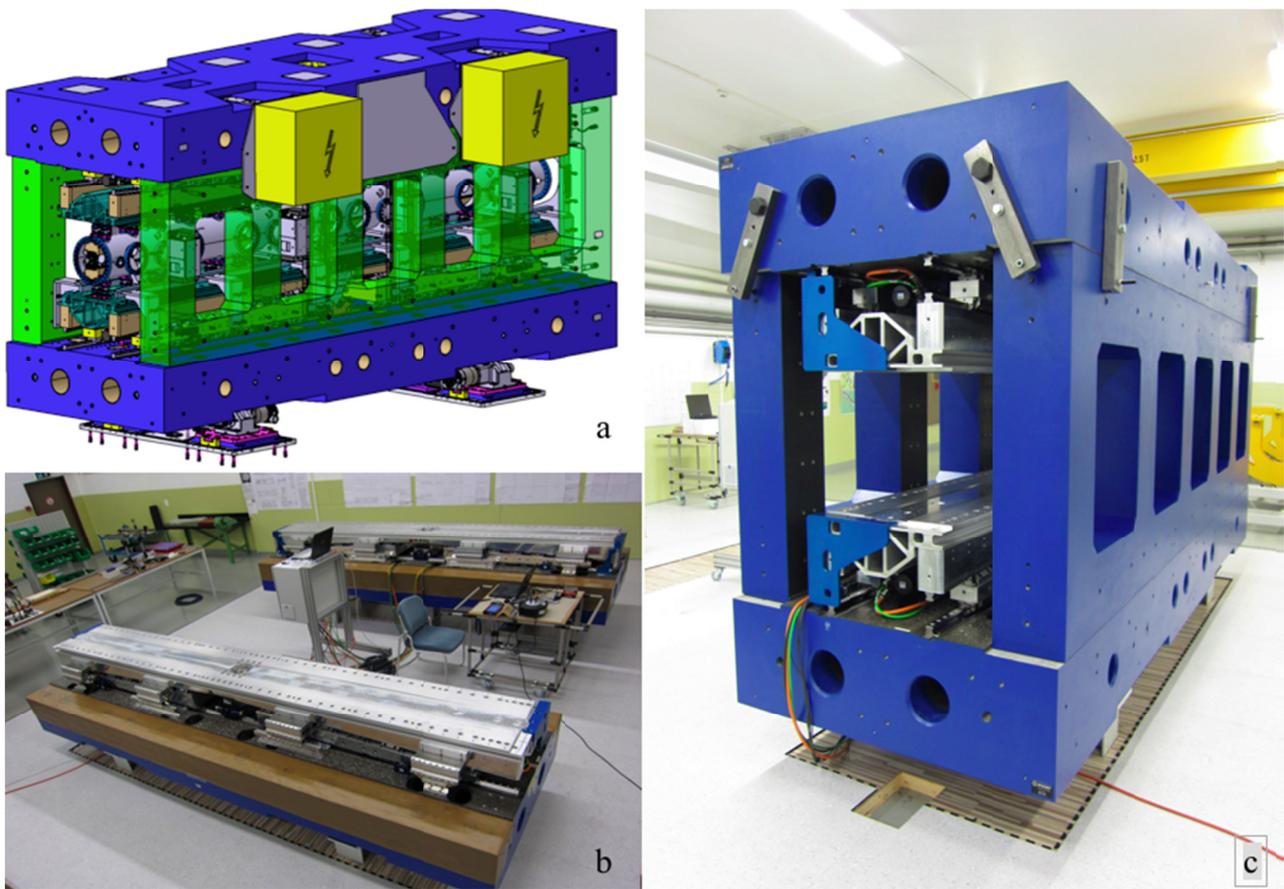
U15 in-vacuum prototype undulator: a) 3D CATIA sketch, b) assembling of top and bottom bases, c) completed support structure before the final gluing of the top bases with the side parts at MDC Max Daetwyler Corporation in Ursenbach, Switzerland.
